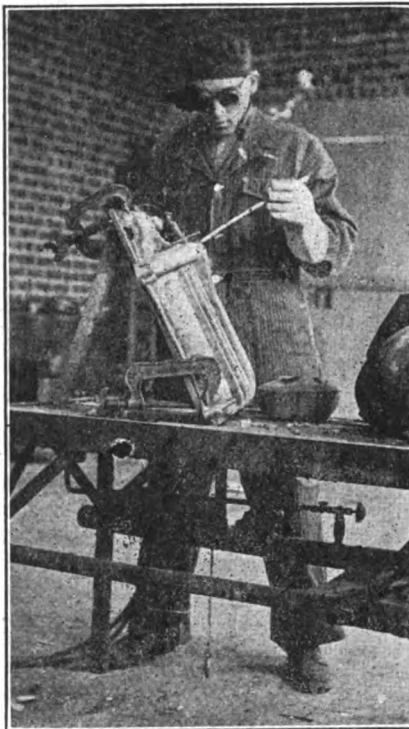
THE WELD WAS STARTED WITH THE CASE IN THIS POSITION
